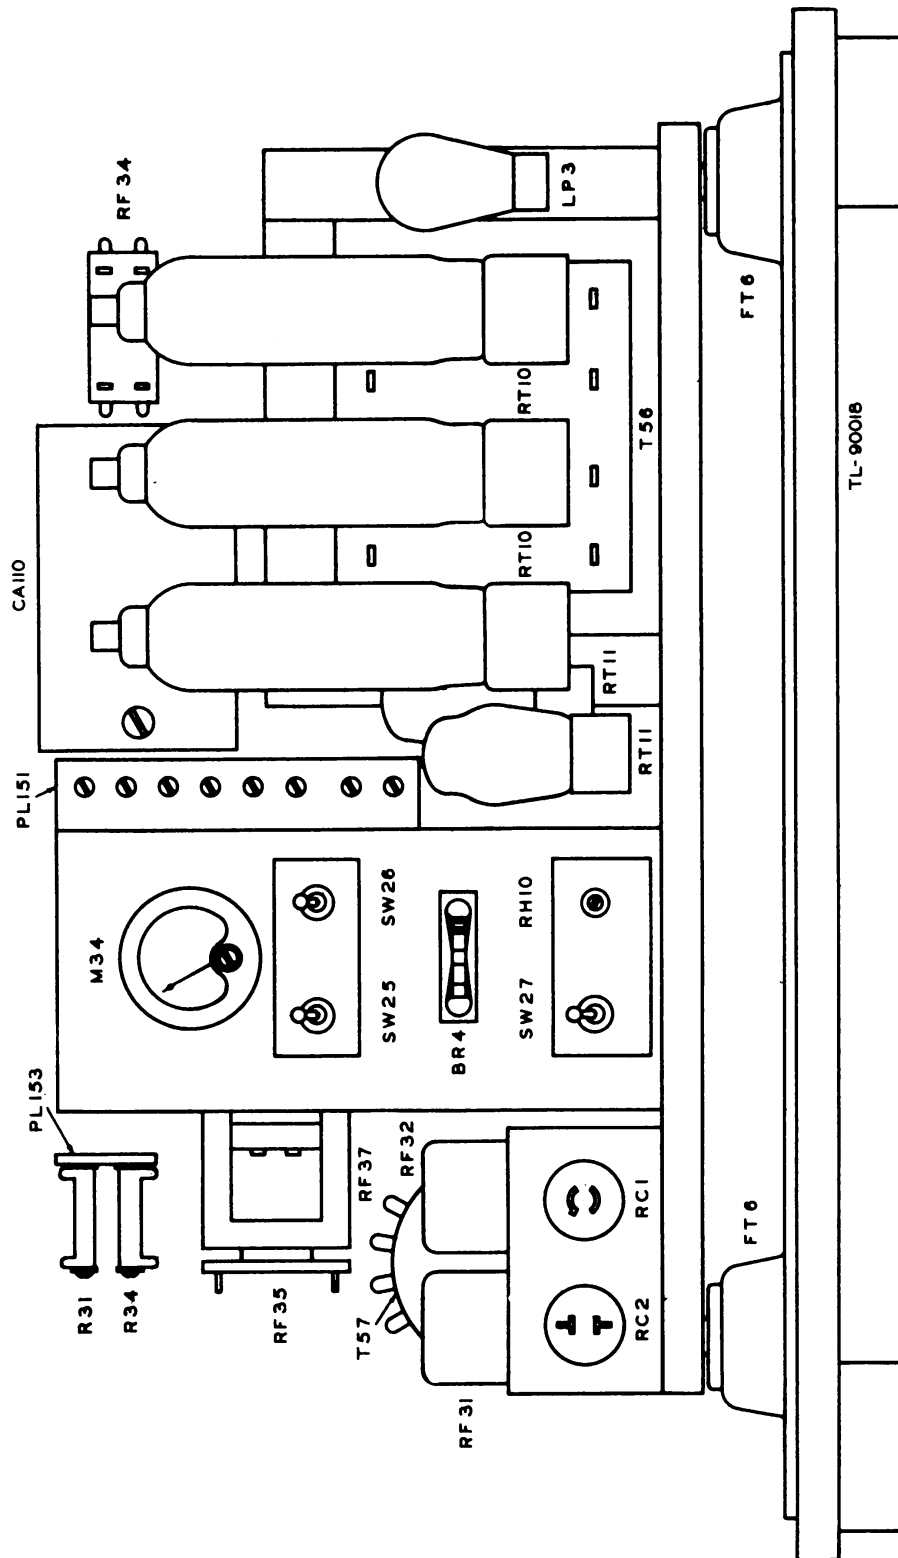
Rectifier RA-43-B, front view, cover removed, parts location diagram.
